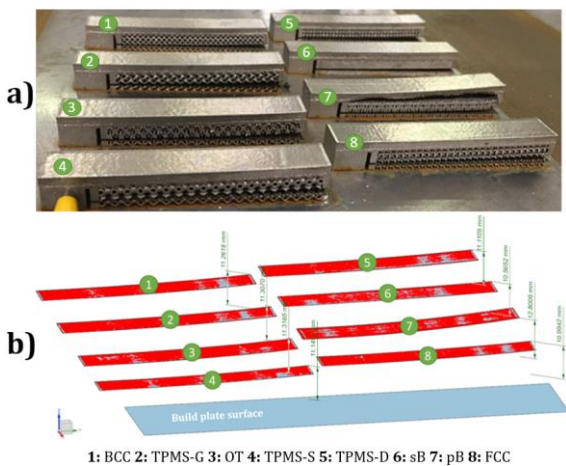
a) Completed build conditions of parts after EDM cut and b) laser scanning and displacement measurements.
